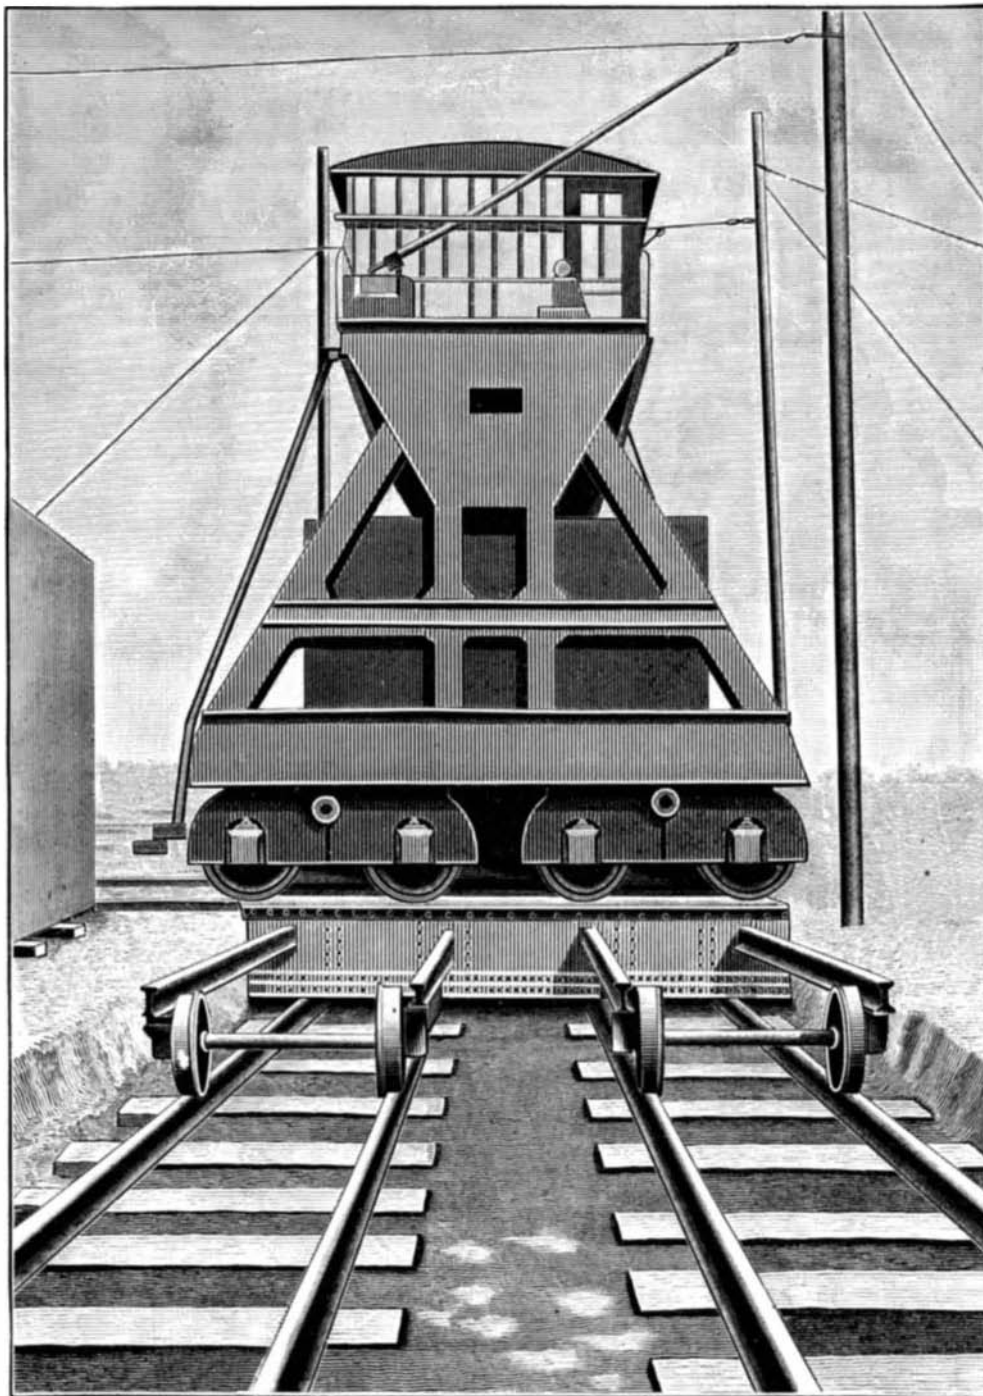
SIDE VIEW OF THE LIFTING APPARATUS.
